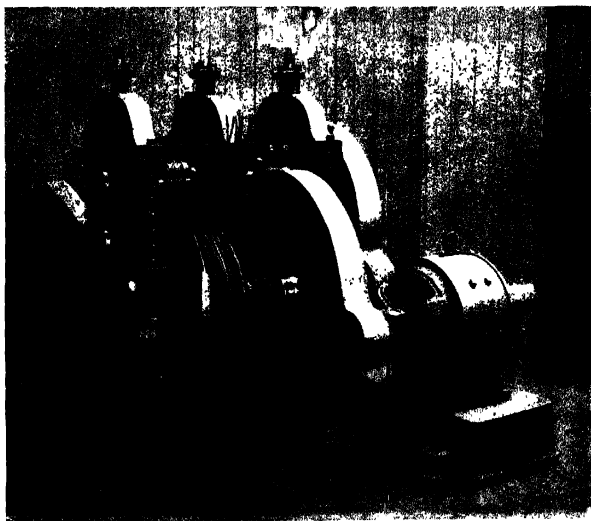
Slitting machine for very narrow strips (Taylor & Challen, Ltd )
